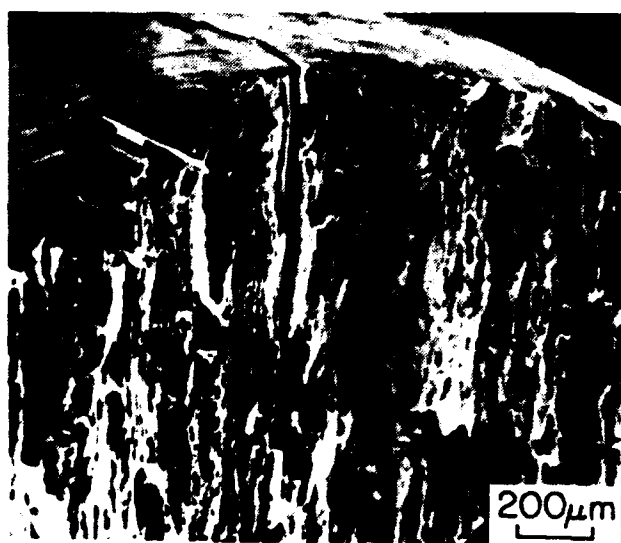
Secondary intergranular cracks on fracture surface. Alloy LCM1 SHT 30 min. at 550°C, aged 48 hr. at 190°C.
